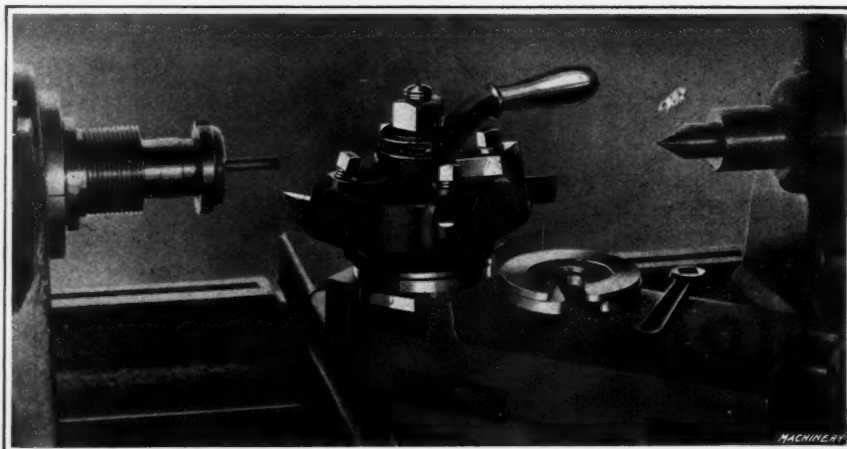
F-P-M Style C Turret Tool-holder set up on a Lathe
